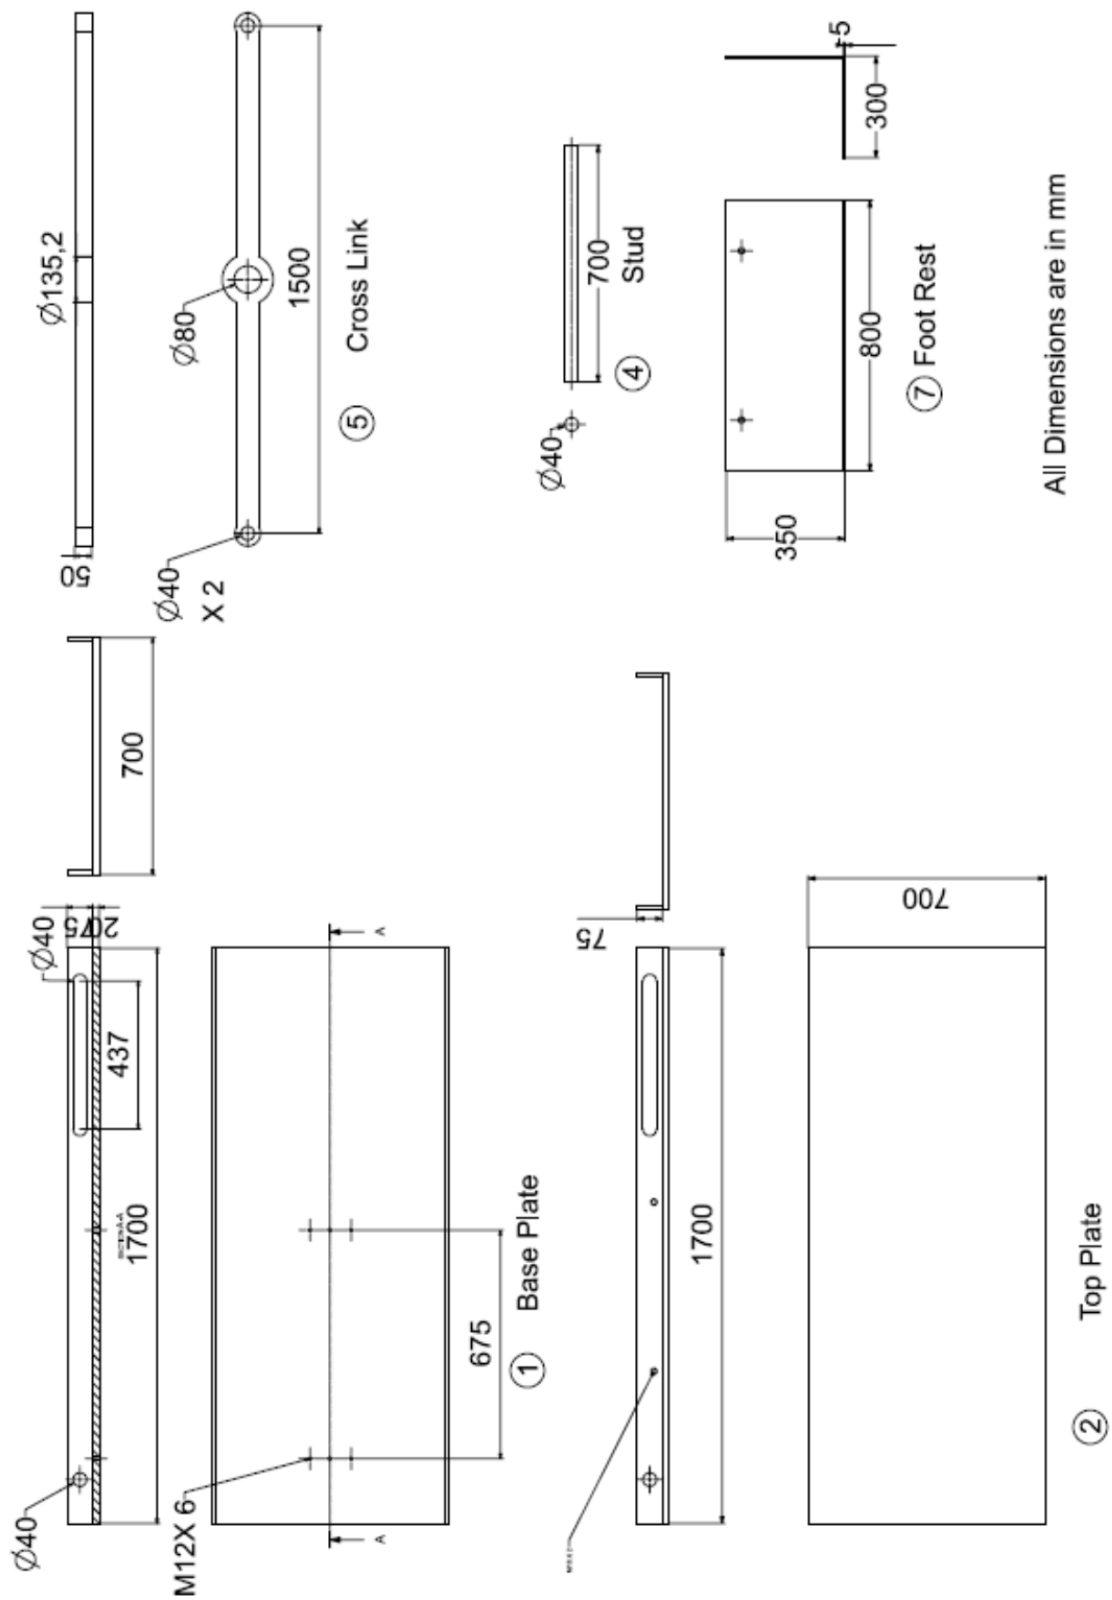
Detailed 2D Drawing of Proposed Multi-Tasking Portable Workbench (Parts)
